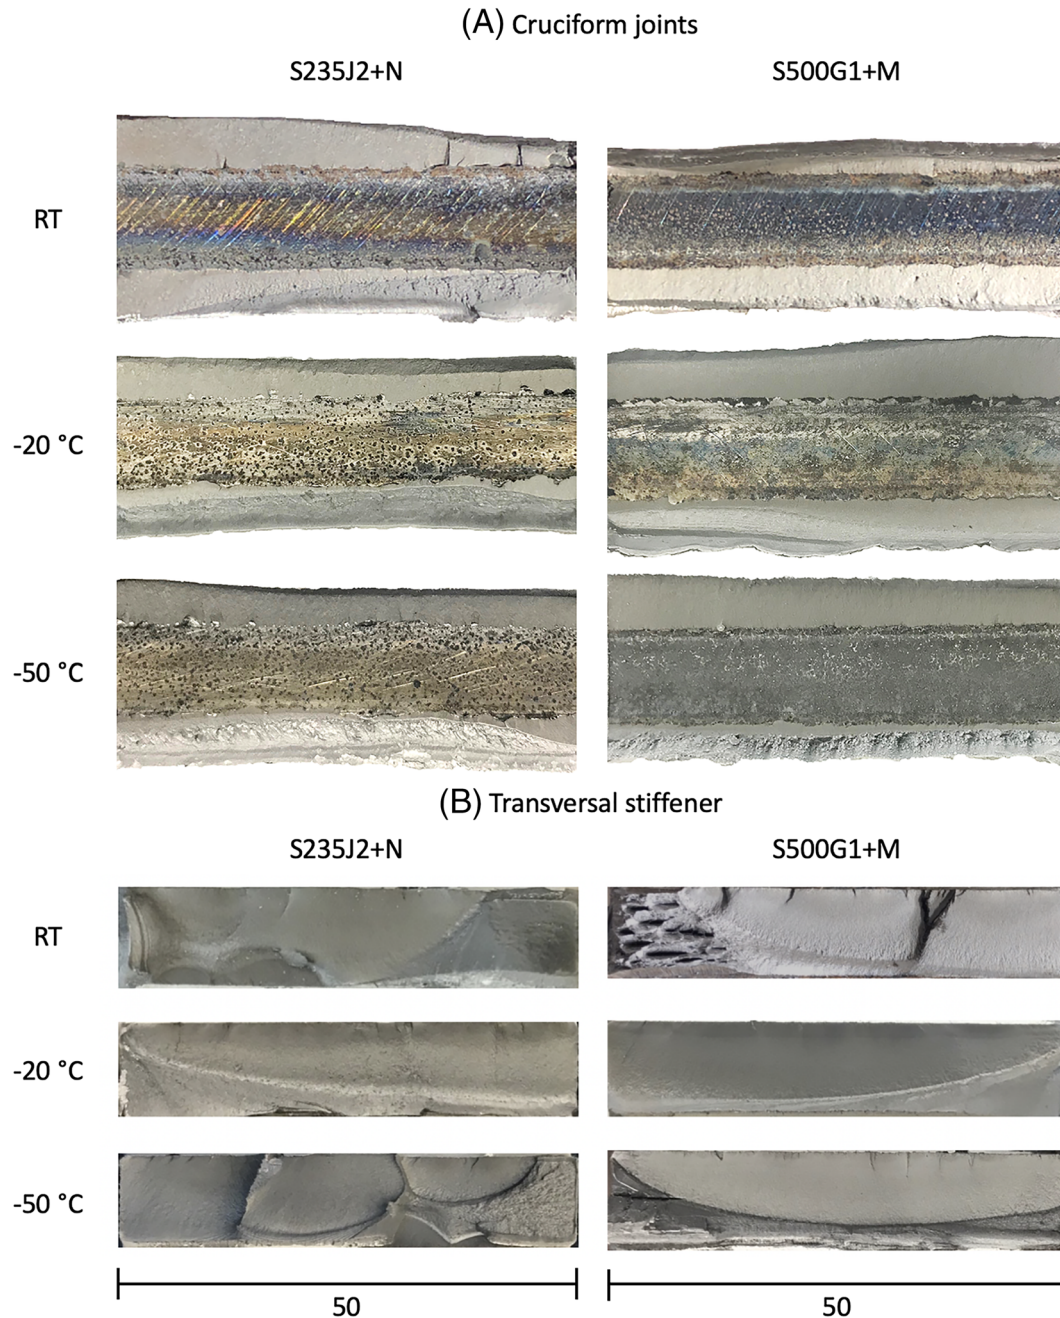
Fracture surface of (A) cruciform joint specimens (the figures show the fractured welds at top and bottom and the nonfused plate surface in the middle) and (B) transversal stiffener (scale in millimetres) [Colour figure can be viewed at wileyonlinelibrary.com]
